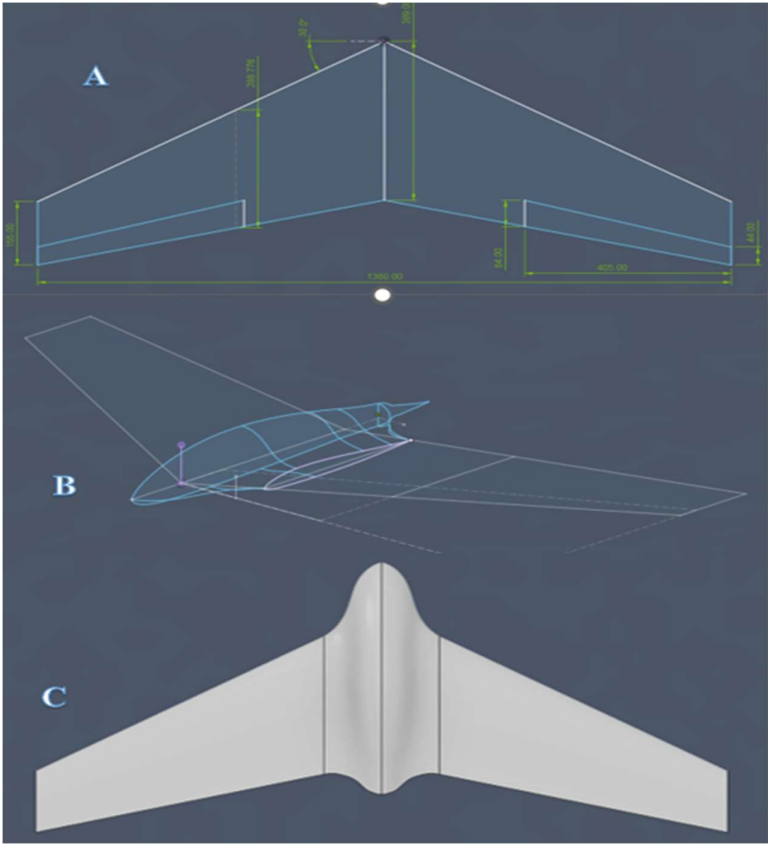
(A) wings and ailerons sketch dimensions. (B) flying wing CAD sketch. (C) flying wing top view.
